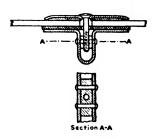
Two sections of plastics sheet are mounted with formed sheet aluminum alloy channel and elastic stop nuts. These stop nuts are small rectangular blocks of aluminum alloy threaded in one direction and with two small holes for rivets at right angles to the bolt hole. Called Plexiglas Elastic Stop Nuts, these were developed by the Douglas Company and were made by the Elastic Stop Nut Corporation.
